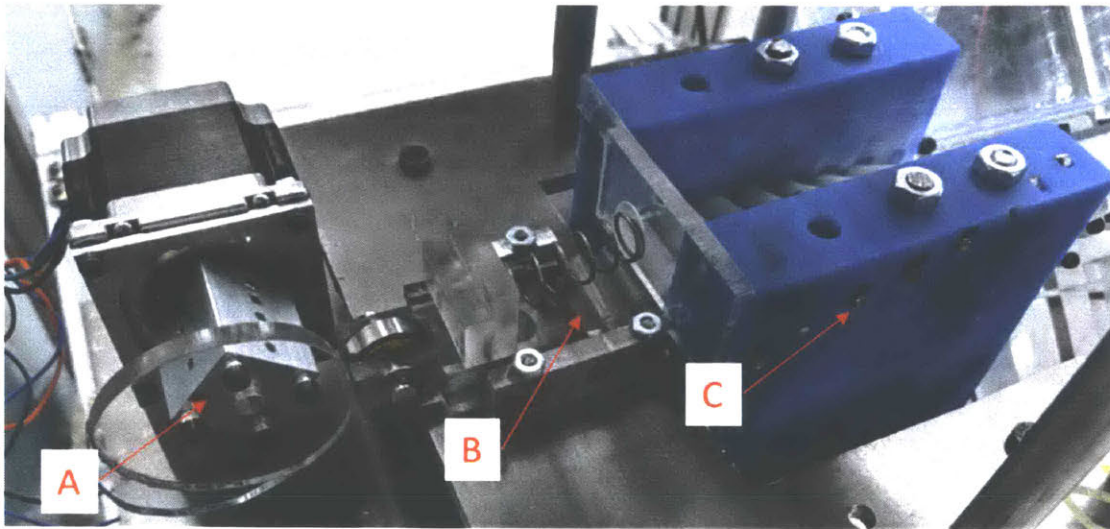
Second stage of the automated packaging machine, transfer line feeder. A) Cam mechanism. B) Vial pusher. C) Vial turner.
